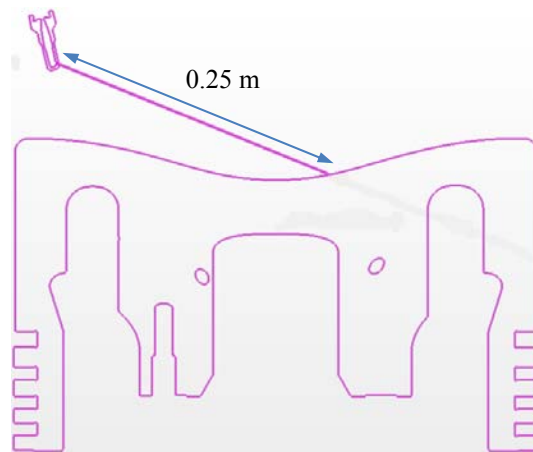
Vertical cut through combustion chamber along spray direction. Only fuel injector and piston crown are shown.
